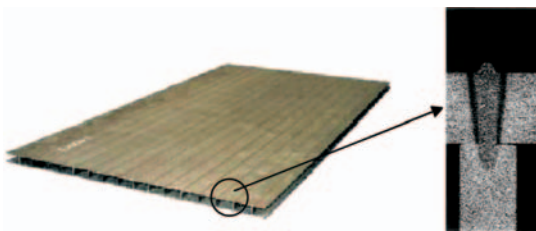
Laser-welded panel fitted with flat steel stiffeners (webs) – (I-core) [4].
